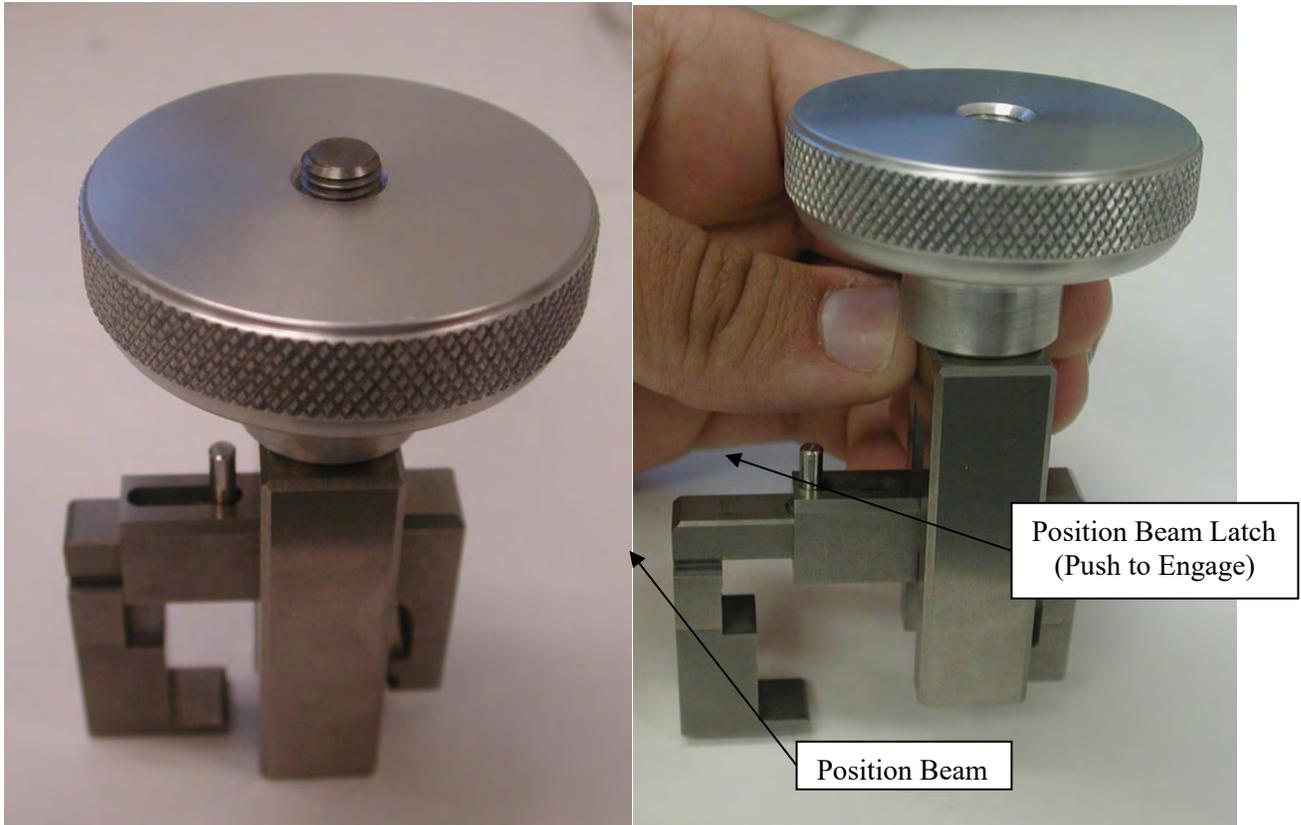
/ Figure 6: 'Closed' Daughtercard Removal Tool / 'Open' Daughtercard Removal Tool
